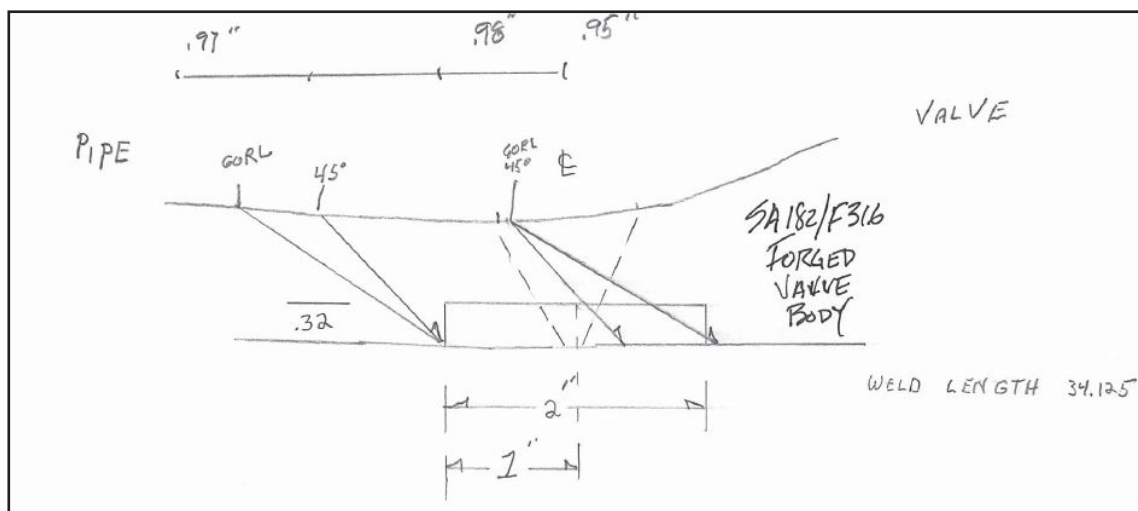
Weld SIF-D090-08, Weld Profile Axial Scan
